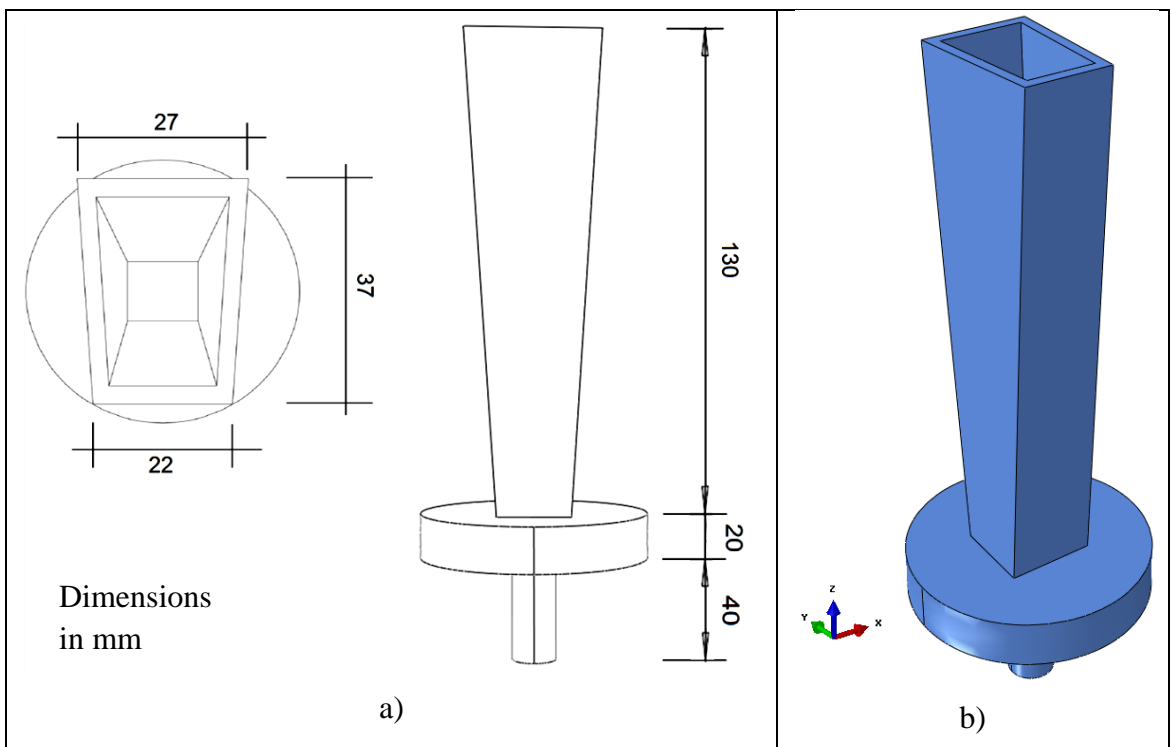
a) Drawing of the steel mould with dimensions in mm, and final solid model in ABAQUS CAE® 6.10.
